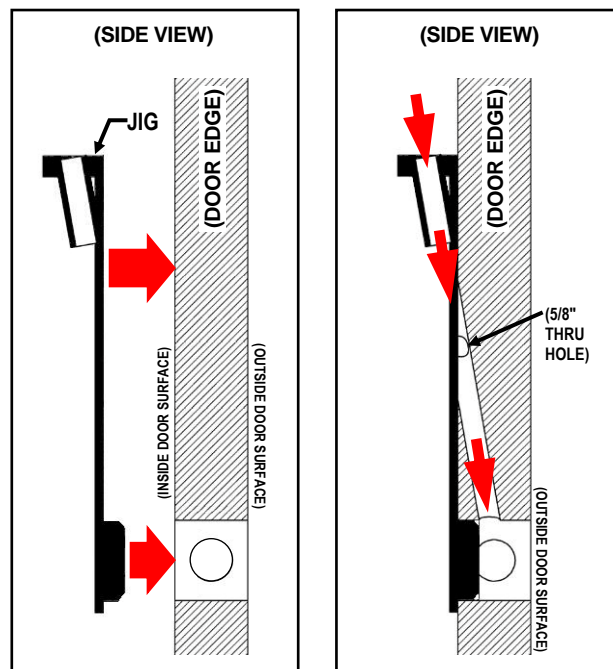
INSERT JIG INTO THE INSIDE ("PROTECTED") SIDE OF THE DOOR. SIDE VIEW AT RIGHT SHOWS THE HOLE PATH
